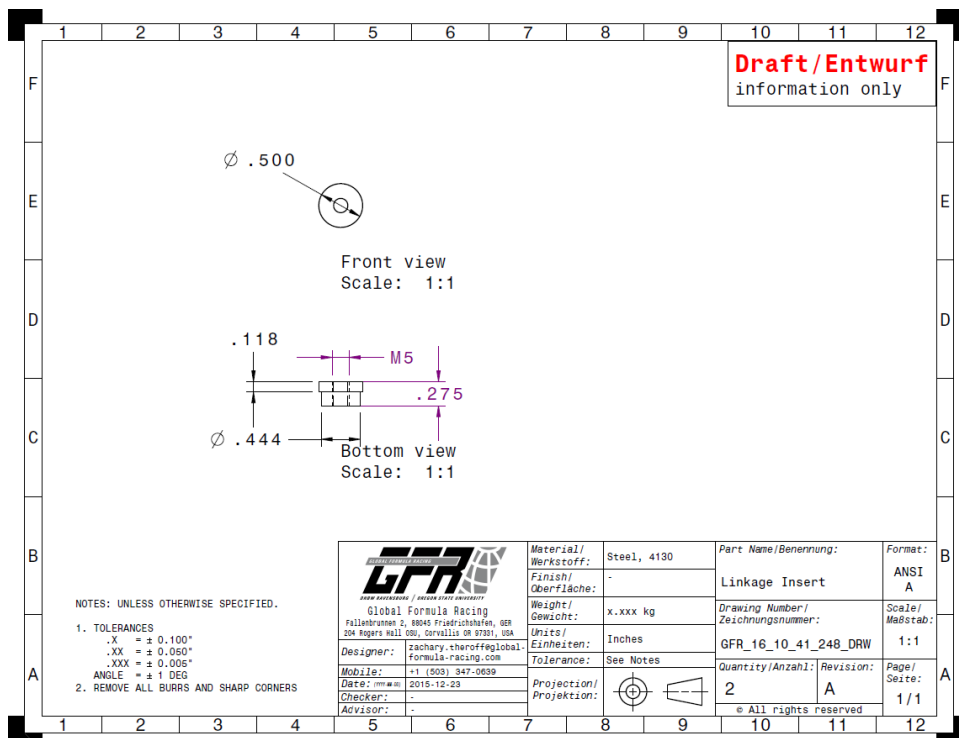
Insert that is welded to end of linkage tube with a threaded hole for an M5 rod end.
